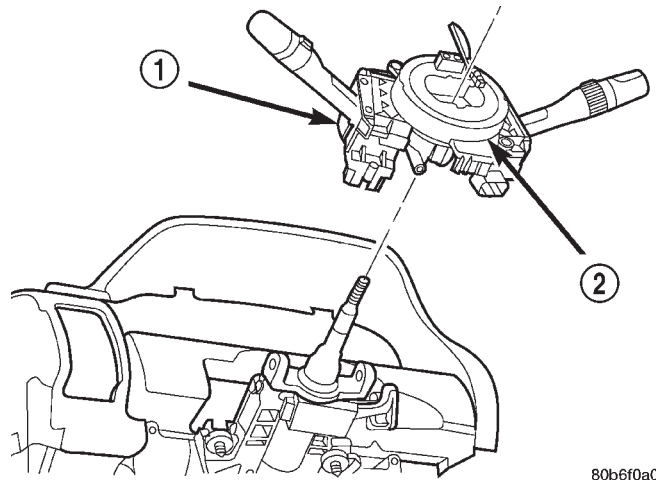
Multi-Function Switch Mounting Housing Screw Remove/Install
